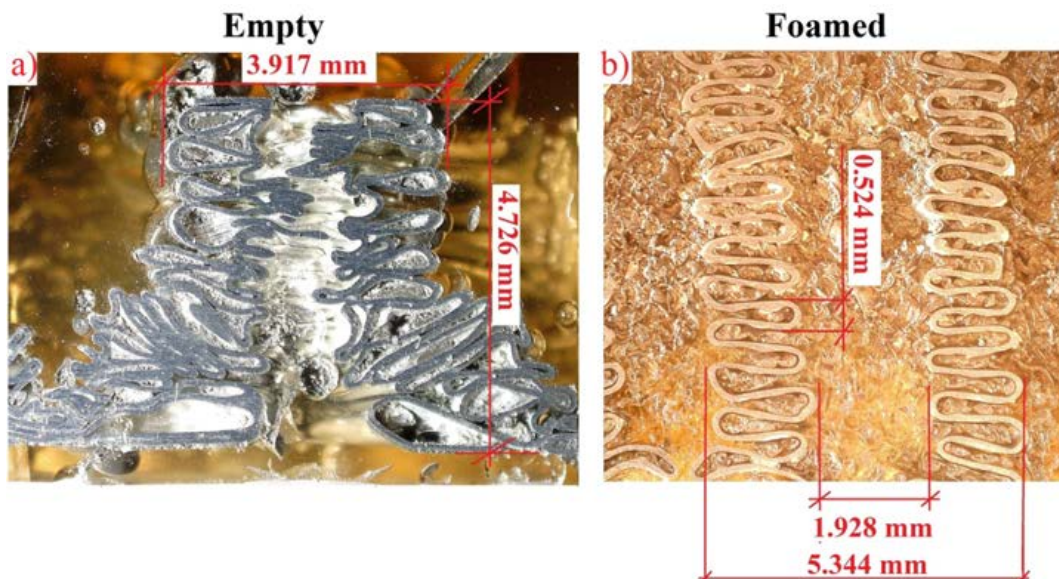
The cross section “A” in collapsed empty HC structure (a) and foam-filled HC (b).
